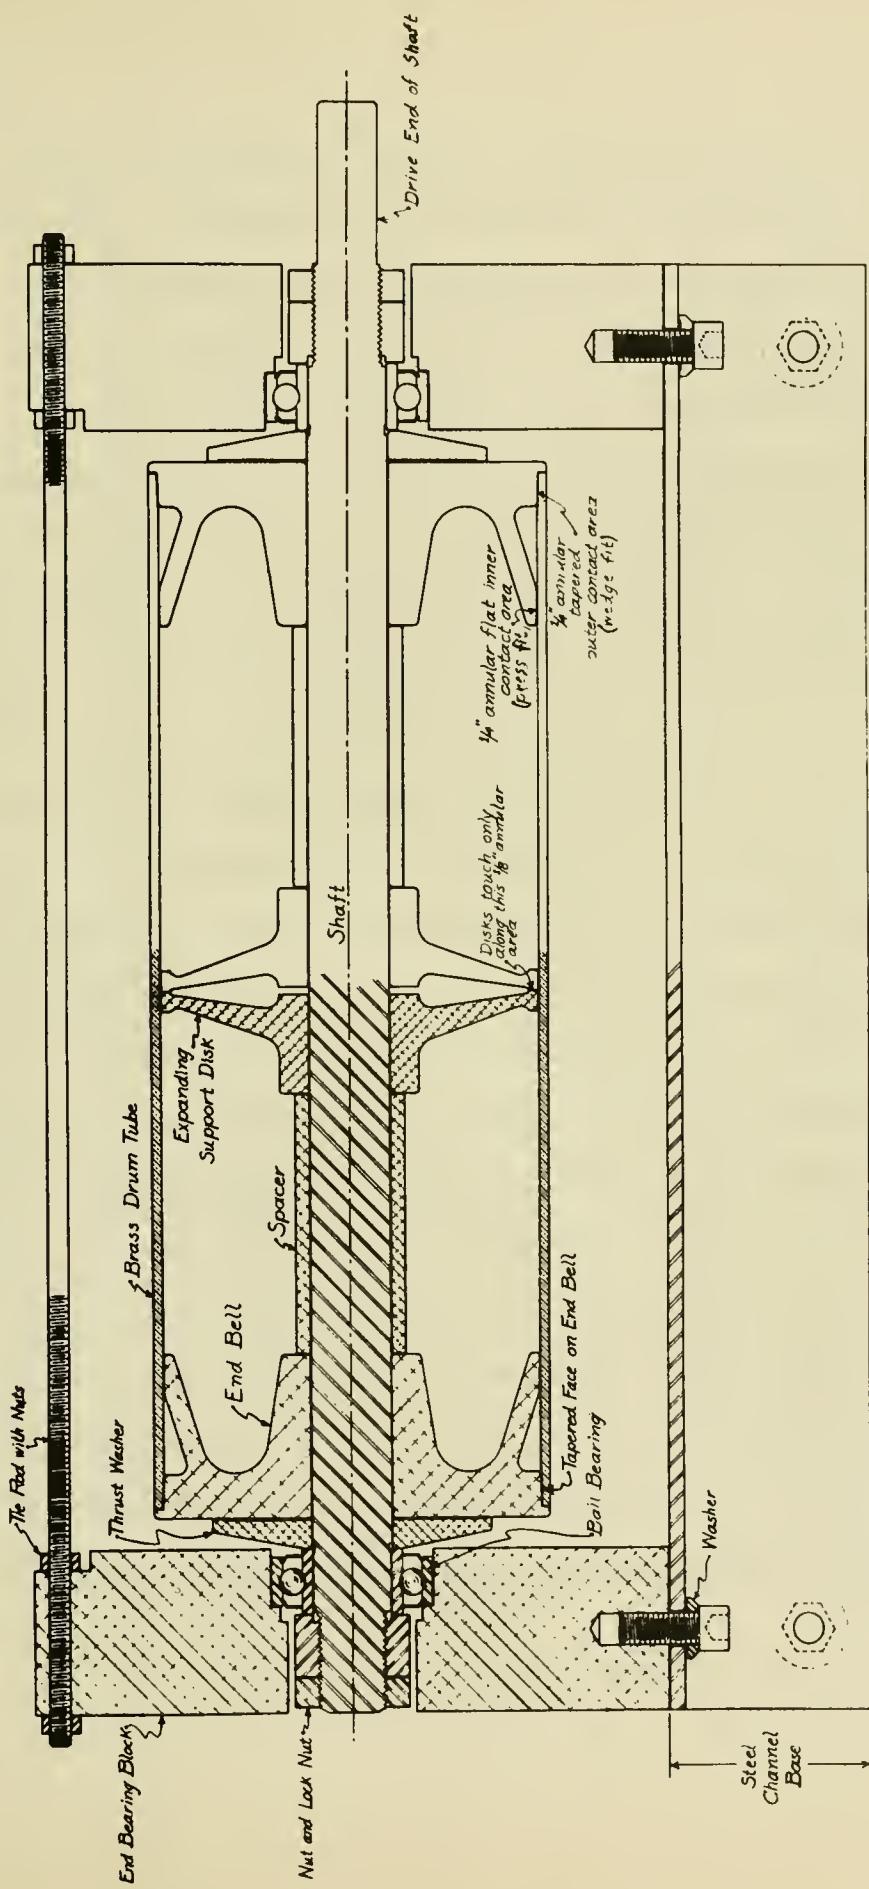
and Drawing C-5-2013 illustrate completely the construction of the drum. Figure A is a photograph of the completed drum with its drive motor and step-up pulleys. The two end bearing blocks of the drum are made of 2" thick aluminum and are mounted on a section of heavy steel channel. The drive motor and step-up pulleys are also mounted on a section of steel channel. These two steel mounting channels are separated from the base plate by strips of a standard rubber vibration mount so that the drum and its drive system are floating on rubber.
